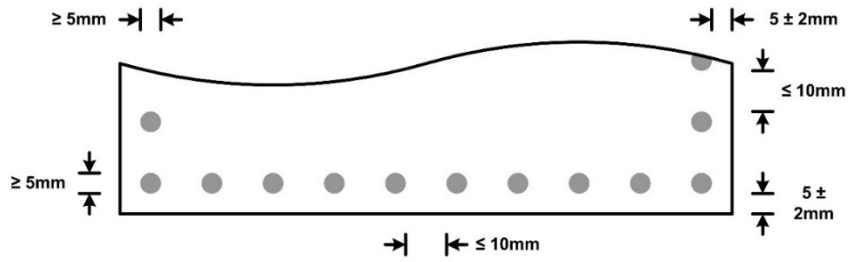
Standard One-Piece Mailer – spot weld requirements (not to scale)
